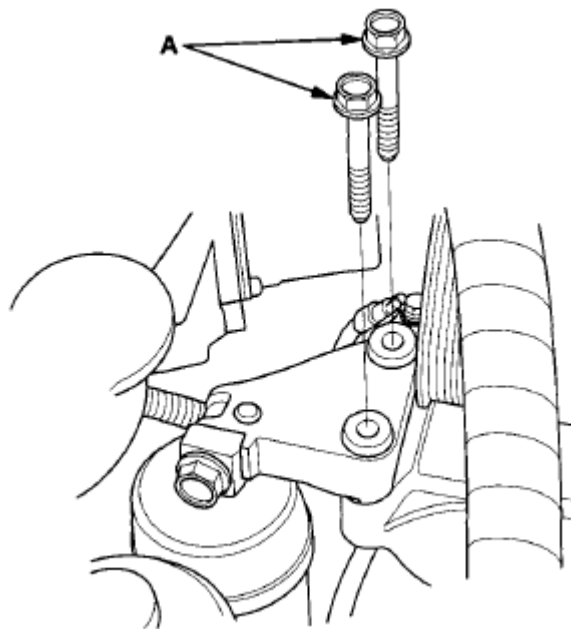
Removing Upper Engine Mount Bracket Bolts
